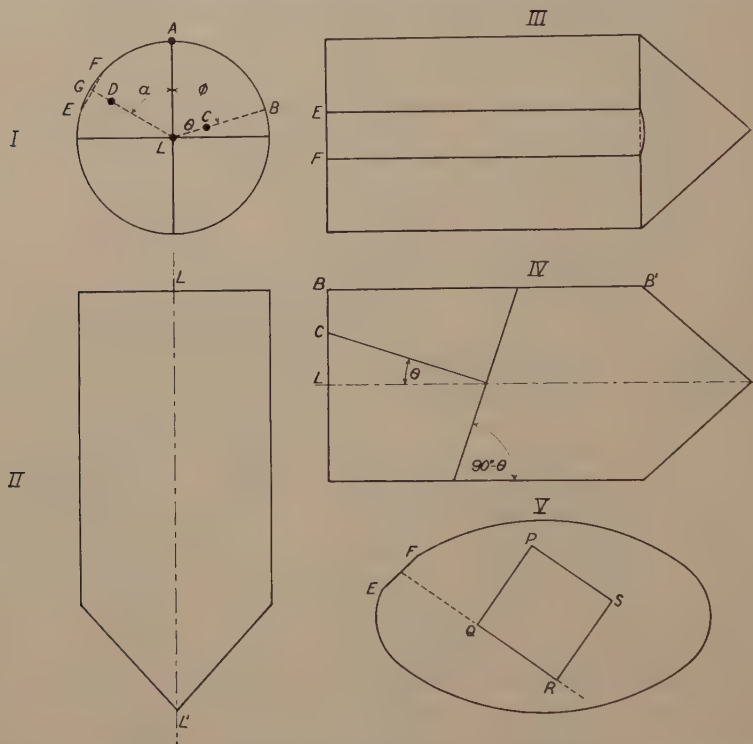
METHOD OF CUTTING OUT SPECIMENS.
